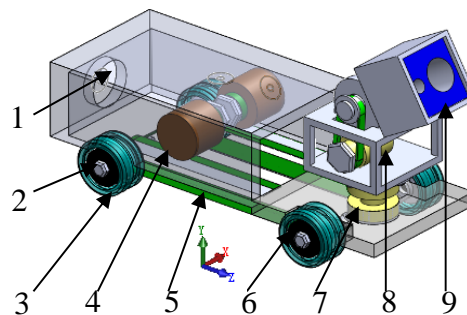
Schematic diagram of magnetic crawler and transmission device: 1- Cable interface, 2- rear wheels(drive wheels), 3- wear-resistant rubber wheel, 4- drive motor, 5- belt, 6- front heels(driven wheels), 7- motor around y-axis, 8- motor around x-axis, 8- image acquisition device.
